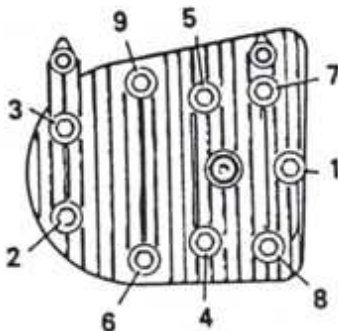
Tighten cylinder head cap screws on Models HM80, VM80, HM100 and VM100 in sequence shown to a torque of 180 in.-lbs. (20 N·m).
